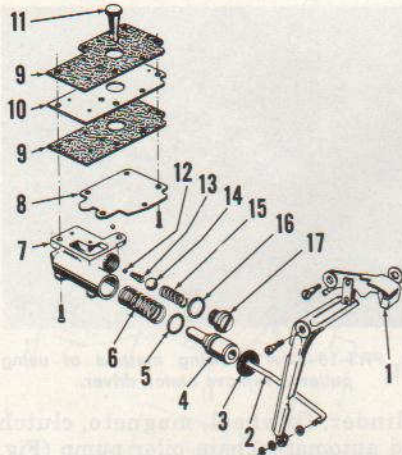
Exploded view of the fuel primer pump used on early models.
